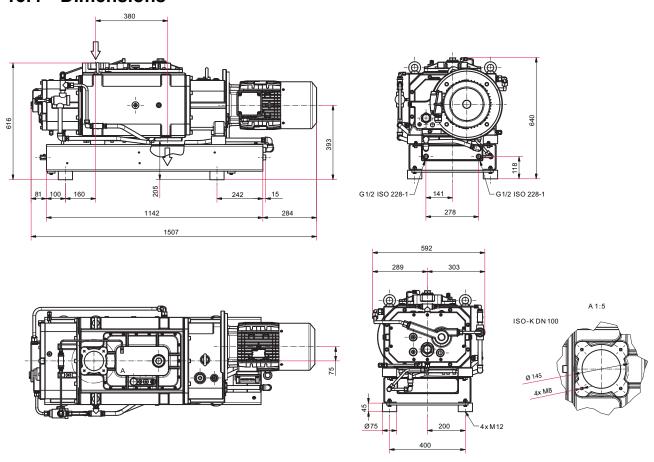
Dimensions of Hepta 630 P Dimensions in mm
